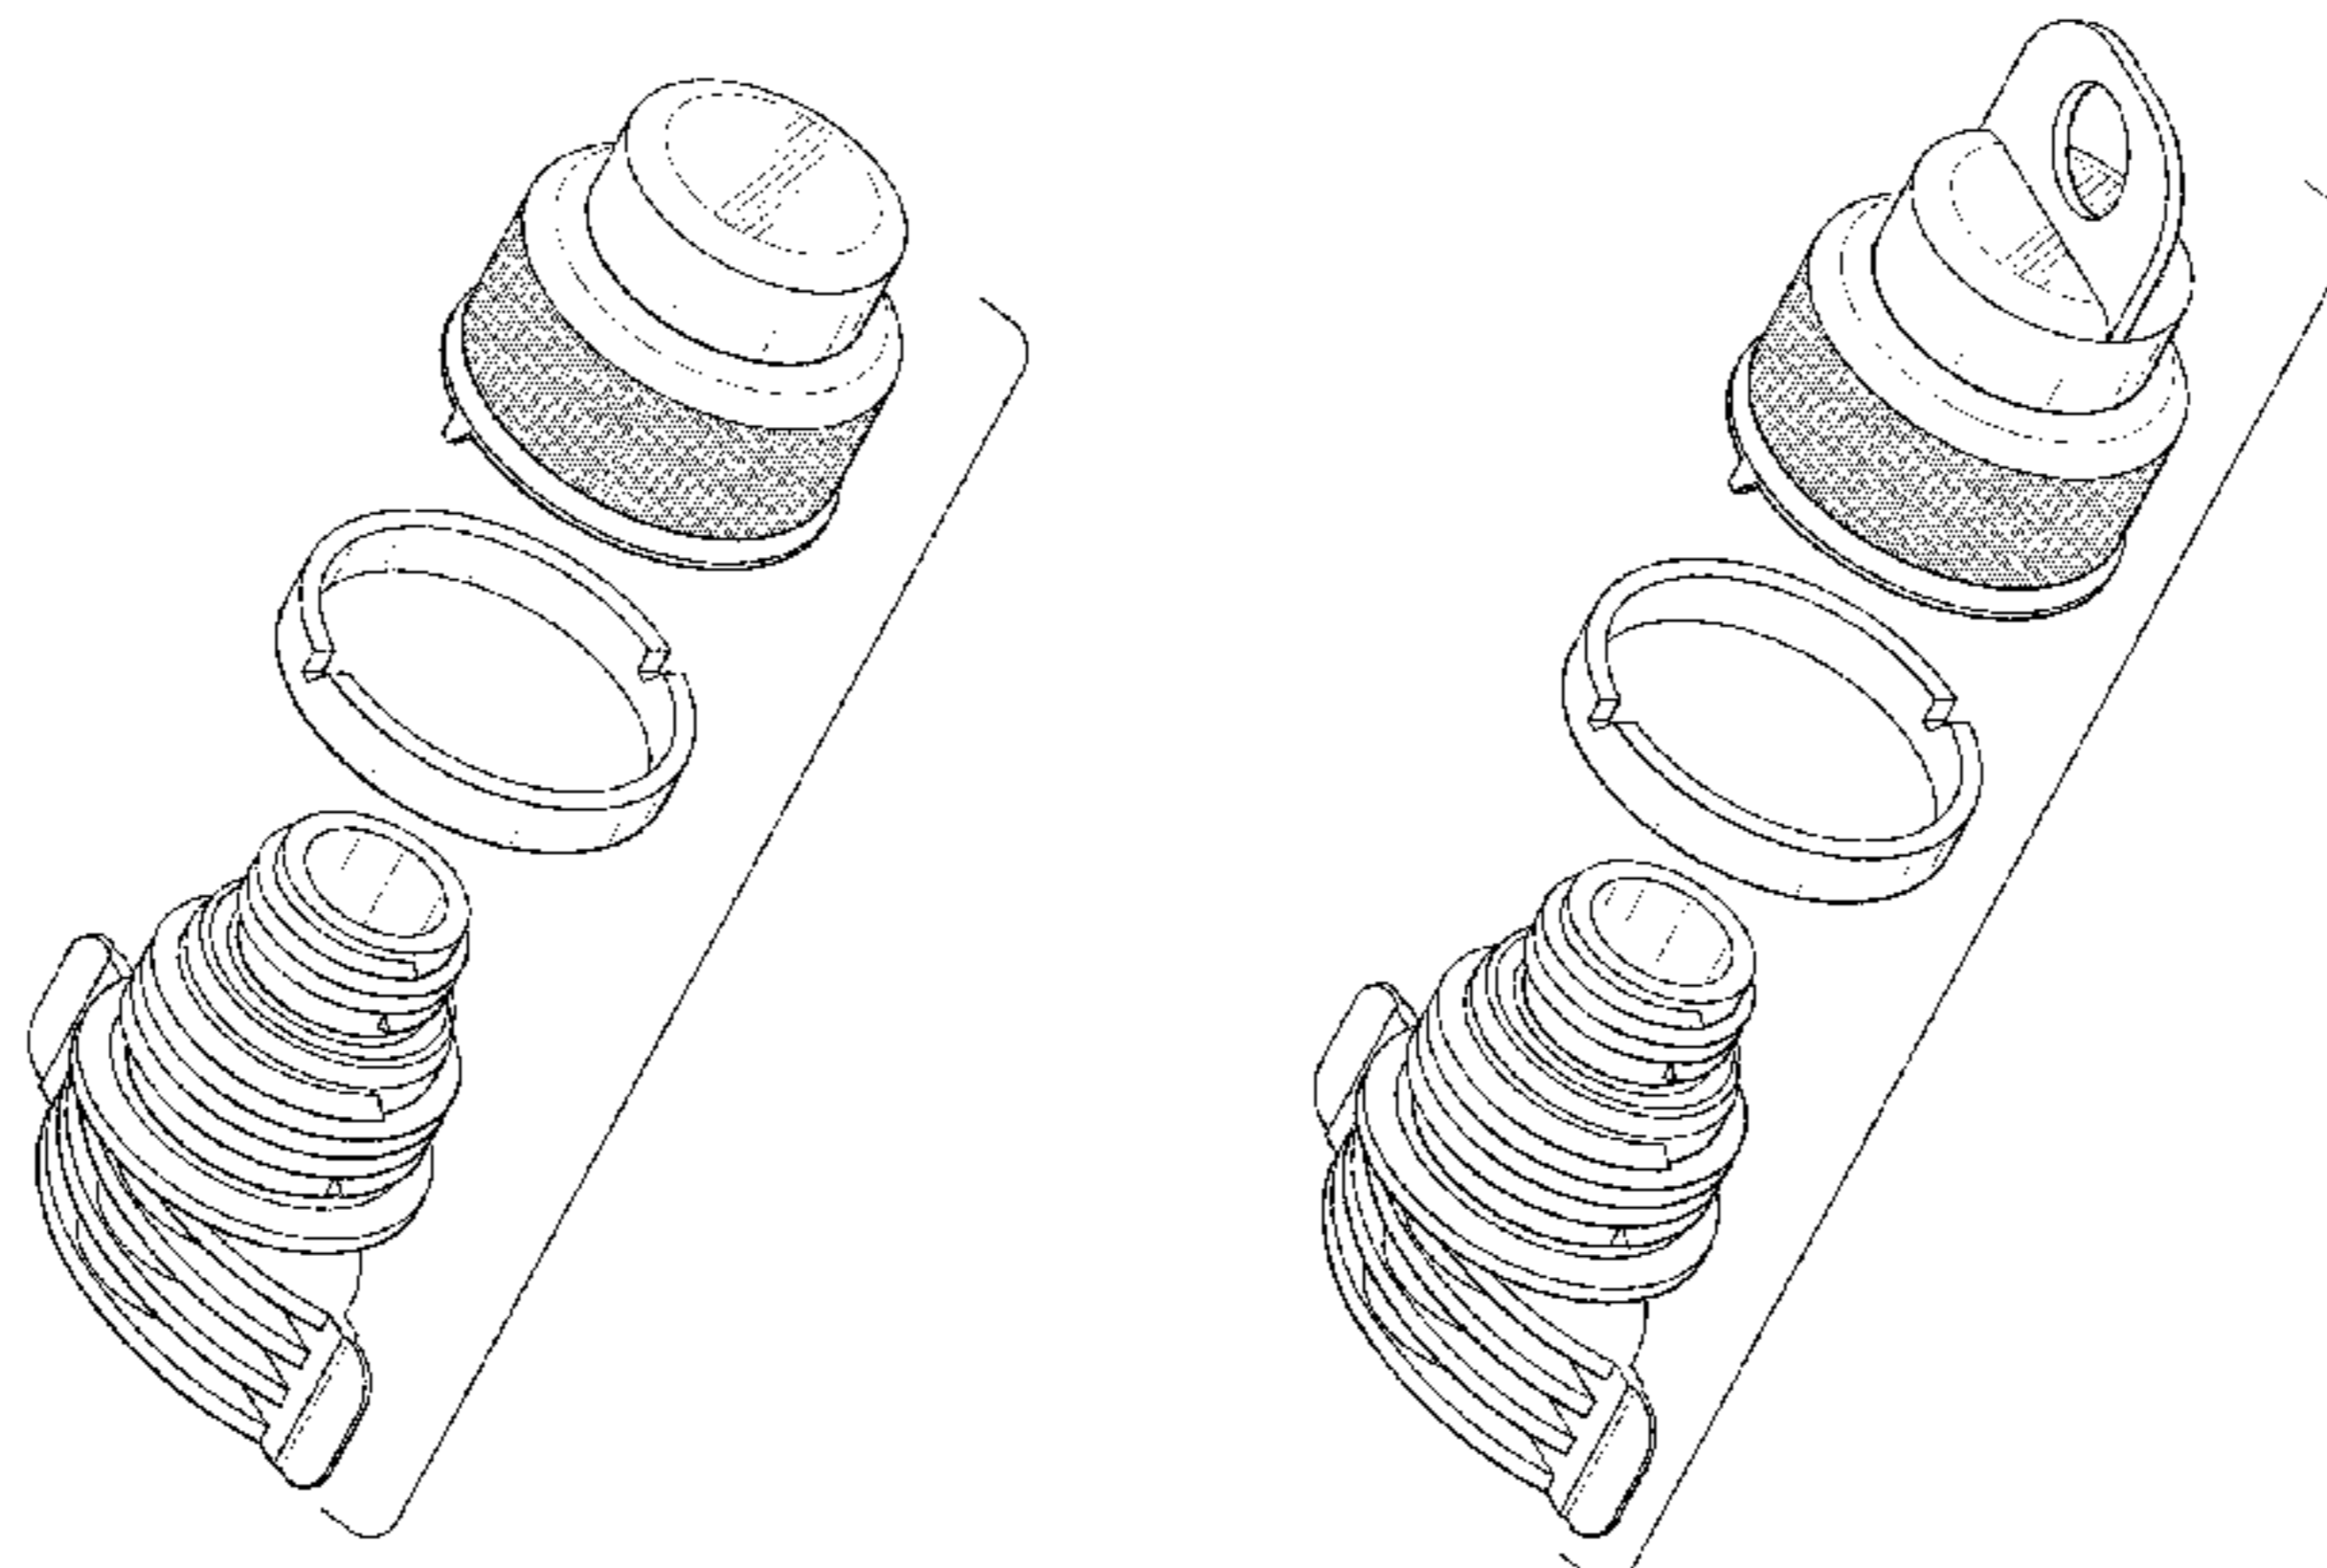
is an exploded left side elevational view of the nozzle and cap assembly of FIG. 1, wherein an exploded right side elevational view is not shown as it is identical to the exploded left side elevational view shown;
